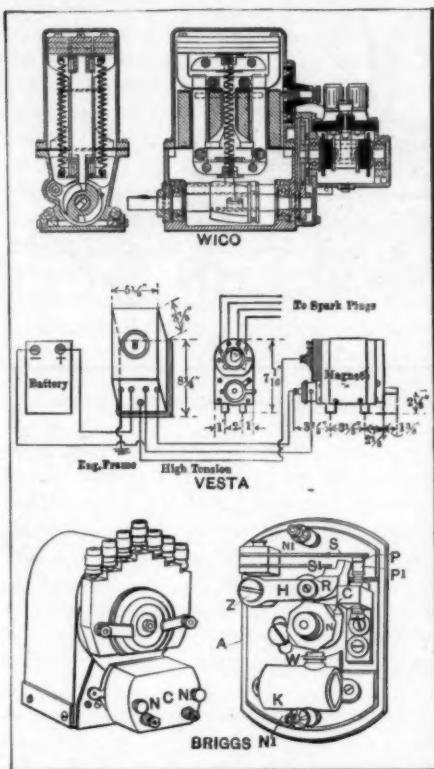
Briggs magneto, showing details of design and the method of wiring up
